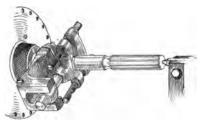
Milling machine dog. The feature of this dog is the ball and socket drive which prevents any tendency to cramp the work. (Ready Tool Co.)
